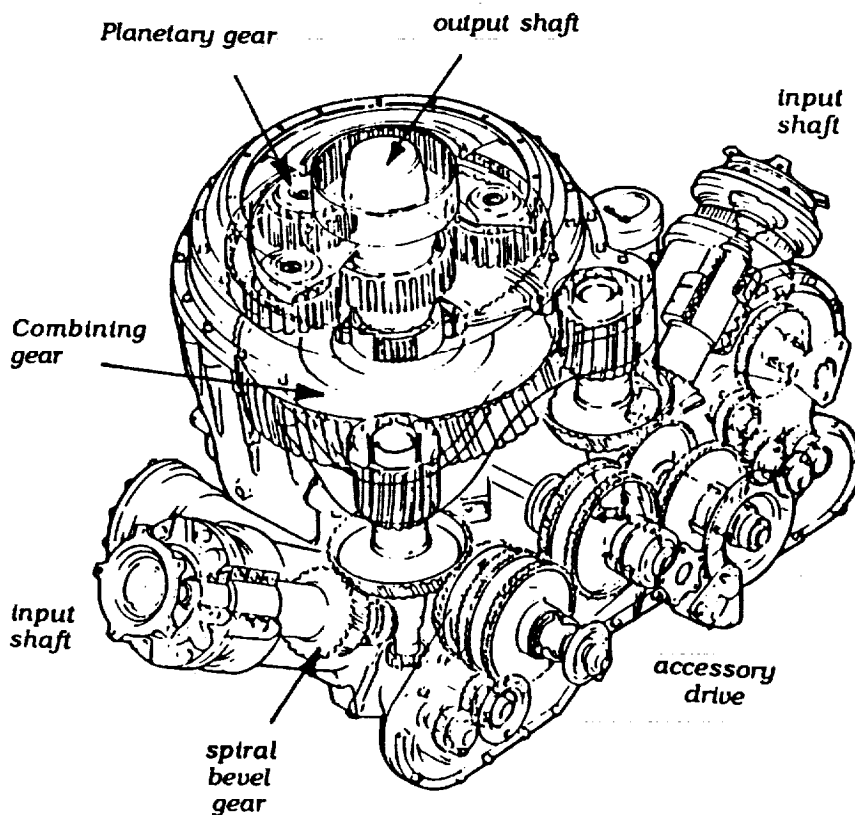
The AH-64 Apache Helicopter Transmission (cutaway view)
